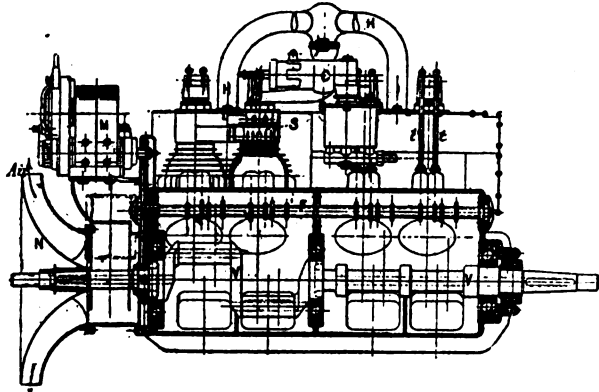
Sectional Elevation of Pipe 70-h.p. Aeronautical Engine.
